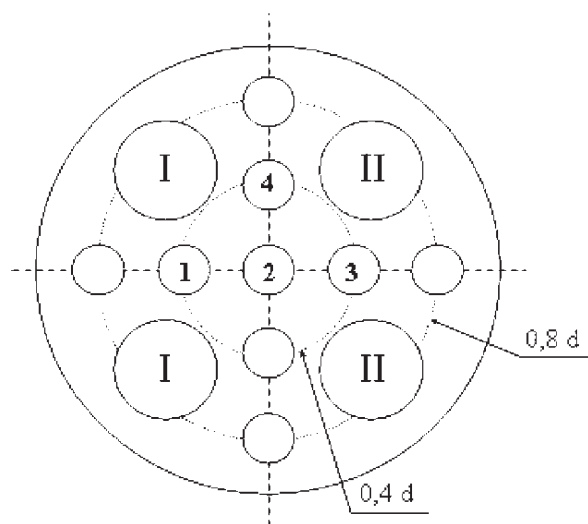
Spark plug location legend in engine head (I – inlet valves, II – outlet valves, d – cylinder bore)
